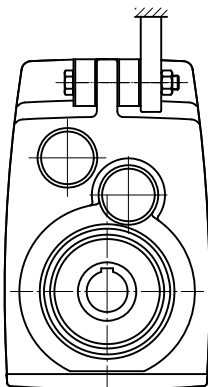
Mounting the rubber buffer (Option G and/or VG) on parallel shaft gear units
